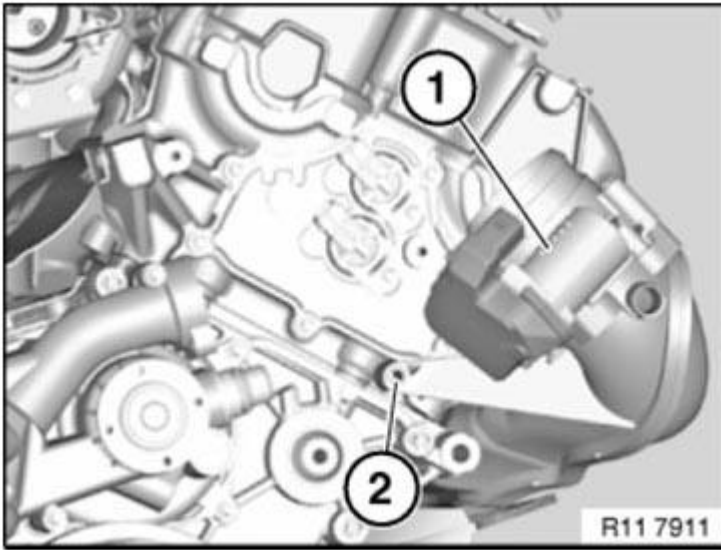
Identifying Throttle Valve And Holder Screw On Intake Plenum
